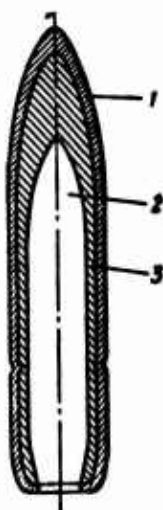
Armor Piercing Bullet (Longitudinal Cross Section): 1, Casing; 2, Steel Core; 3, Lead Jacket.
